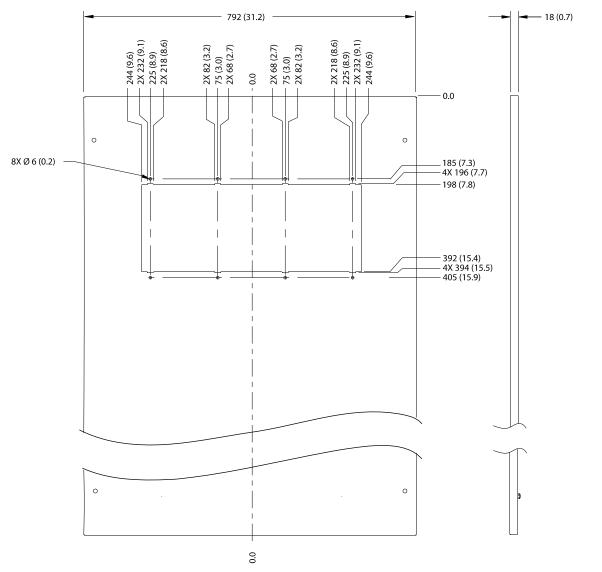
Vent Dimensions for Backplate in 800 mm (32 in) Enclosure
